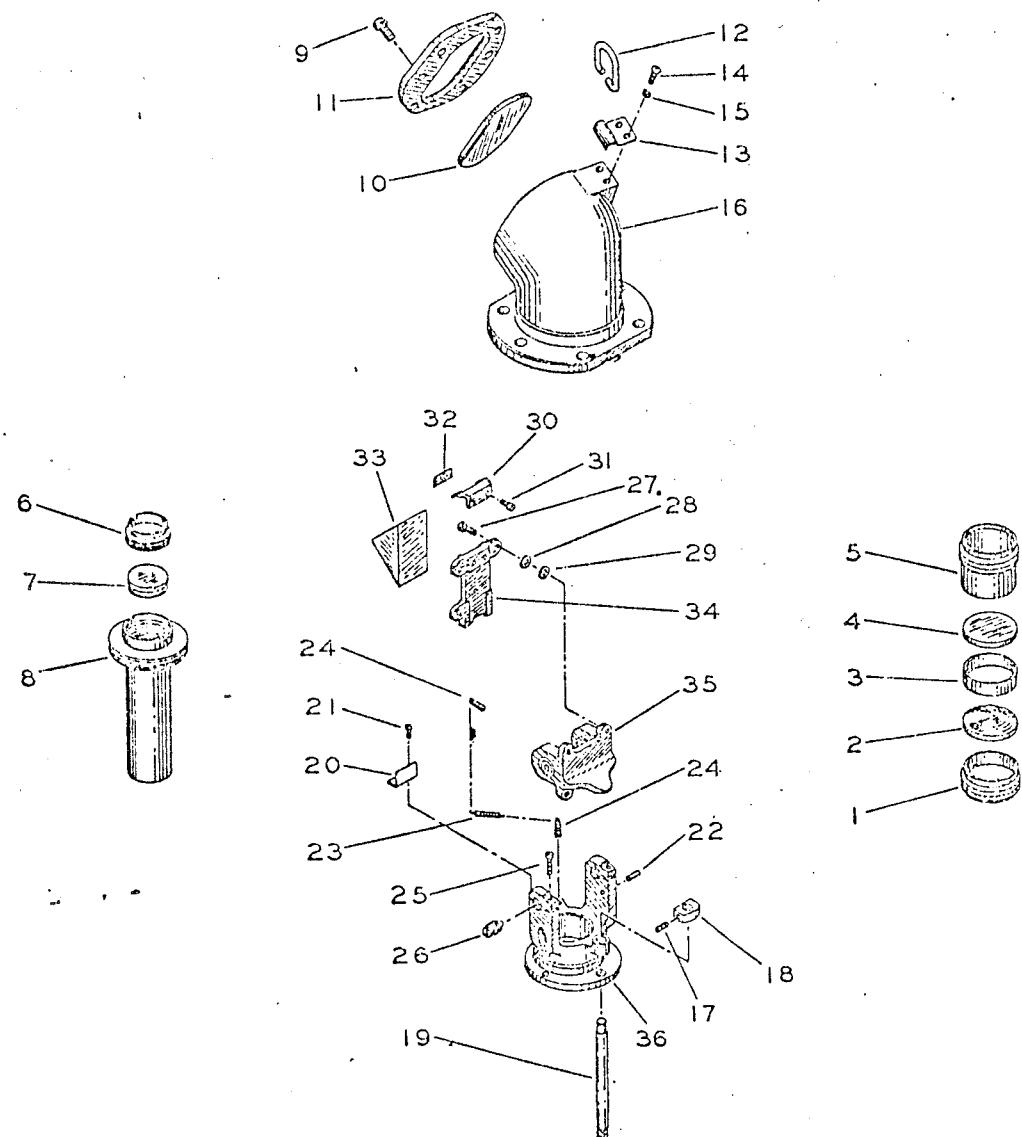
Condenser Lens Assembly, 1st and 2nd Objective Lens Assembly, Index Housing Assembly, and Index Prism Mount Assembly
